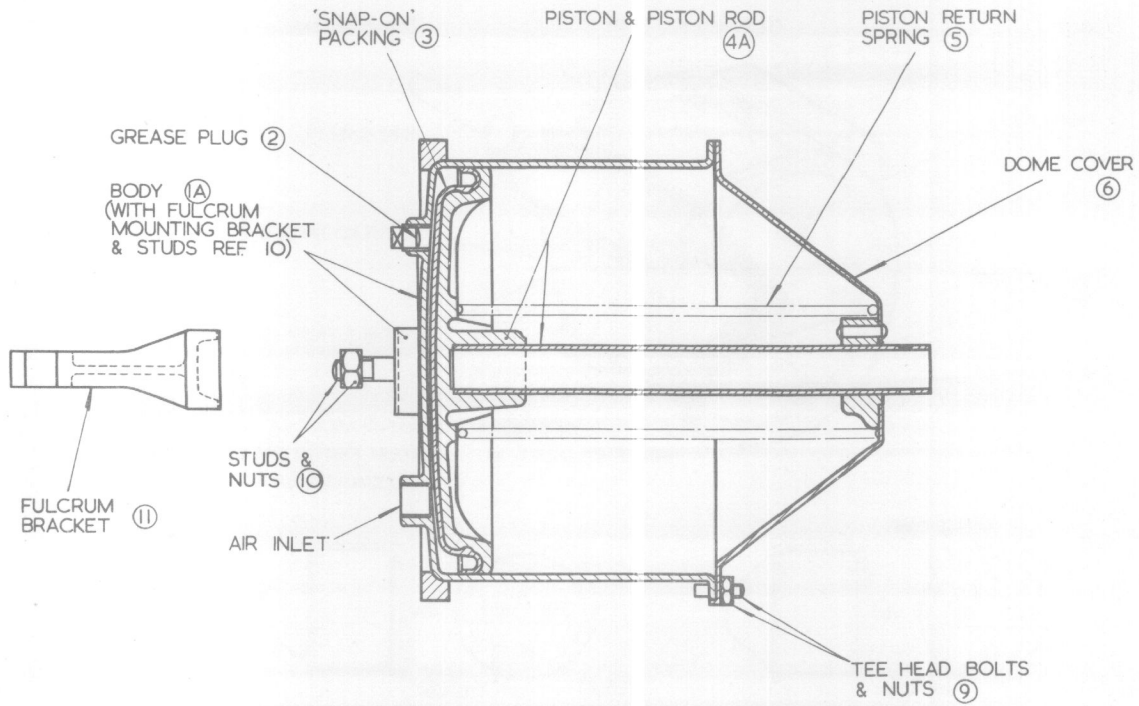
TYPICAL BRAKE CYLINDER TYPE H.F. (WITH DOMED END COVER)
